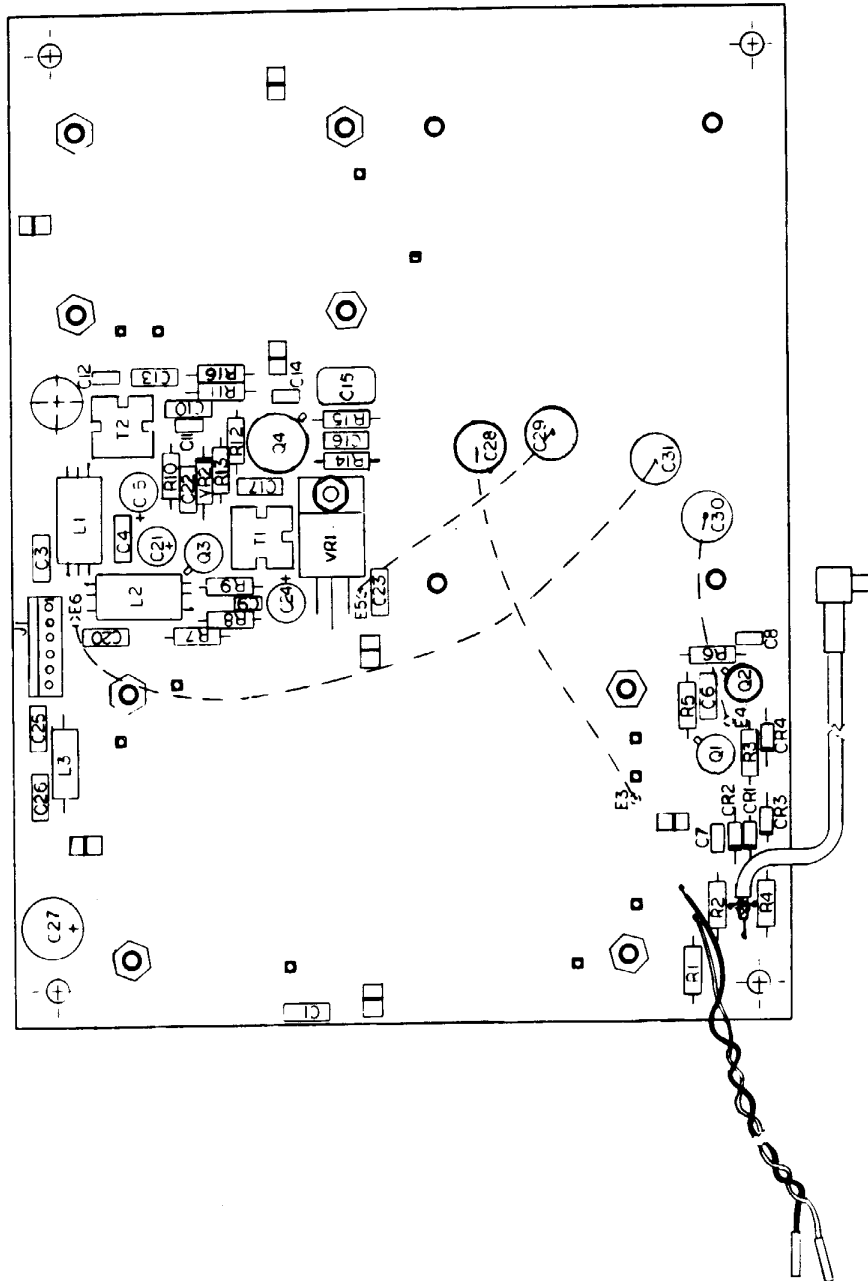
PLL I Assembly A6 and PLL I Motherboard Assembly A6A1
